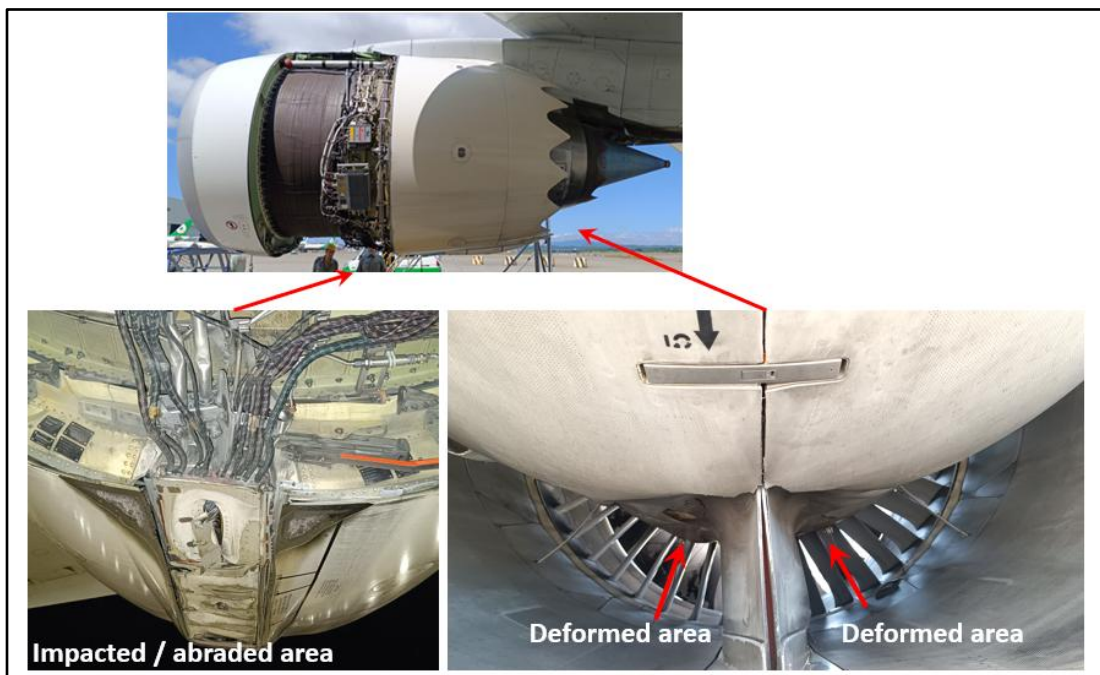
No. 4 engine thrust reverser cowl damage areas
